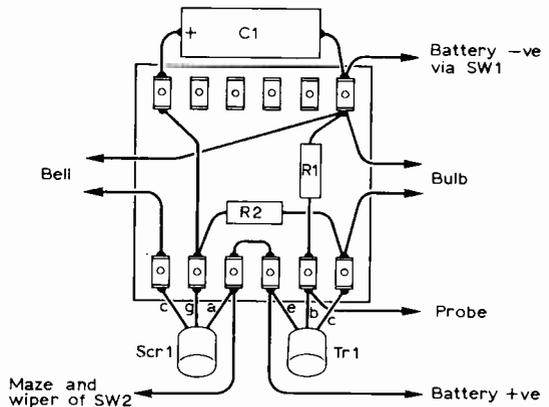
The electronic components are mounted on a small piece of tag board as shown.
